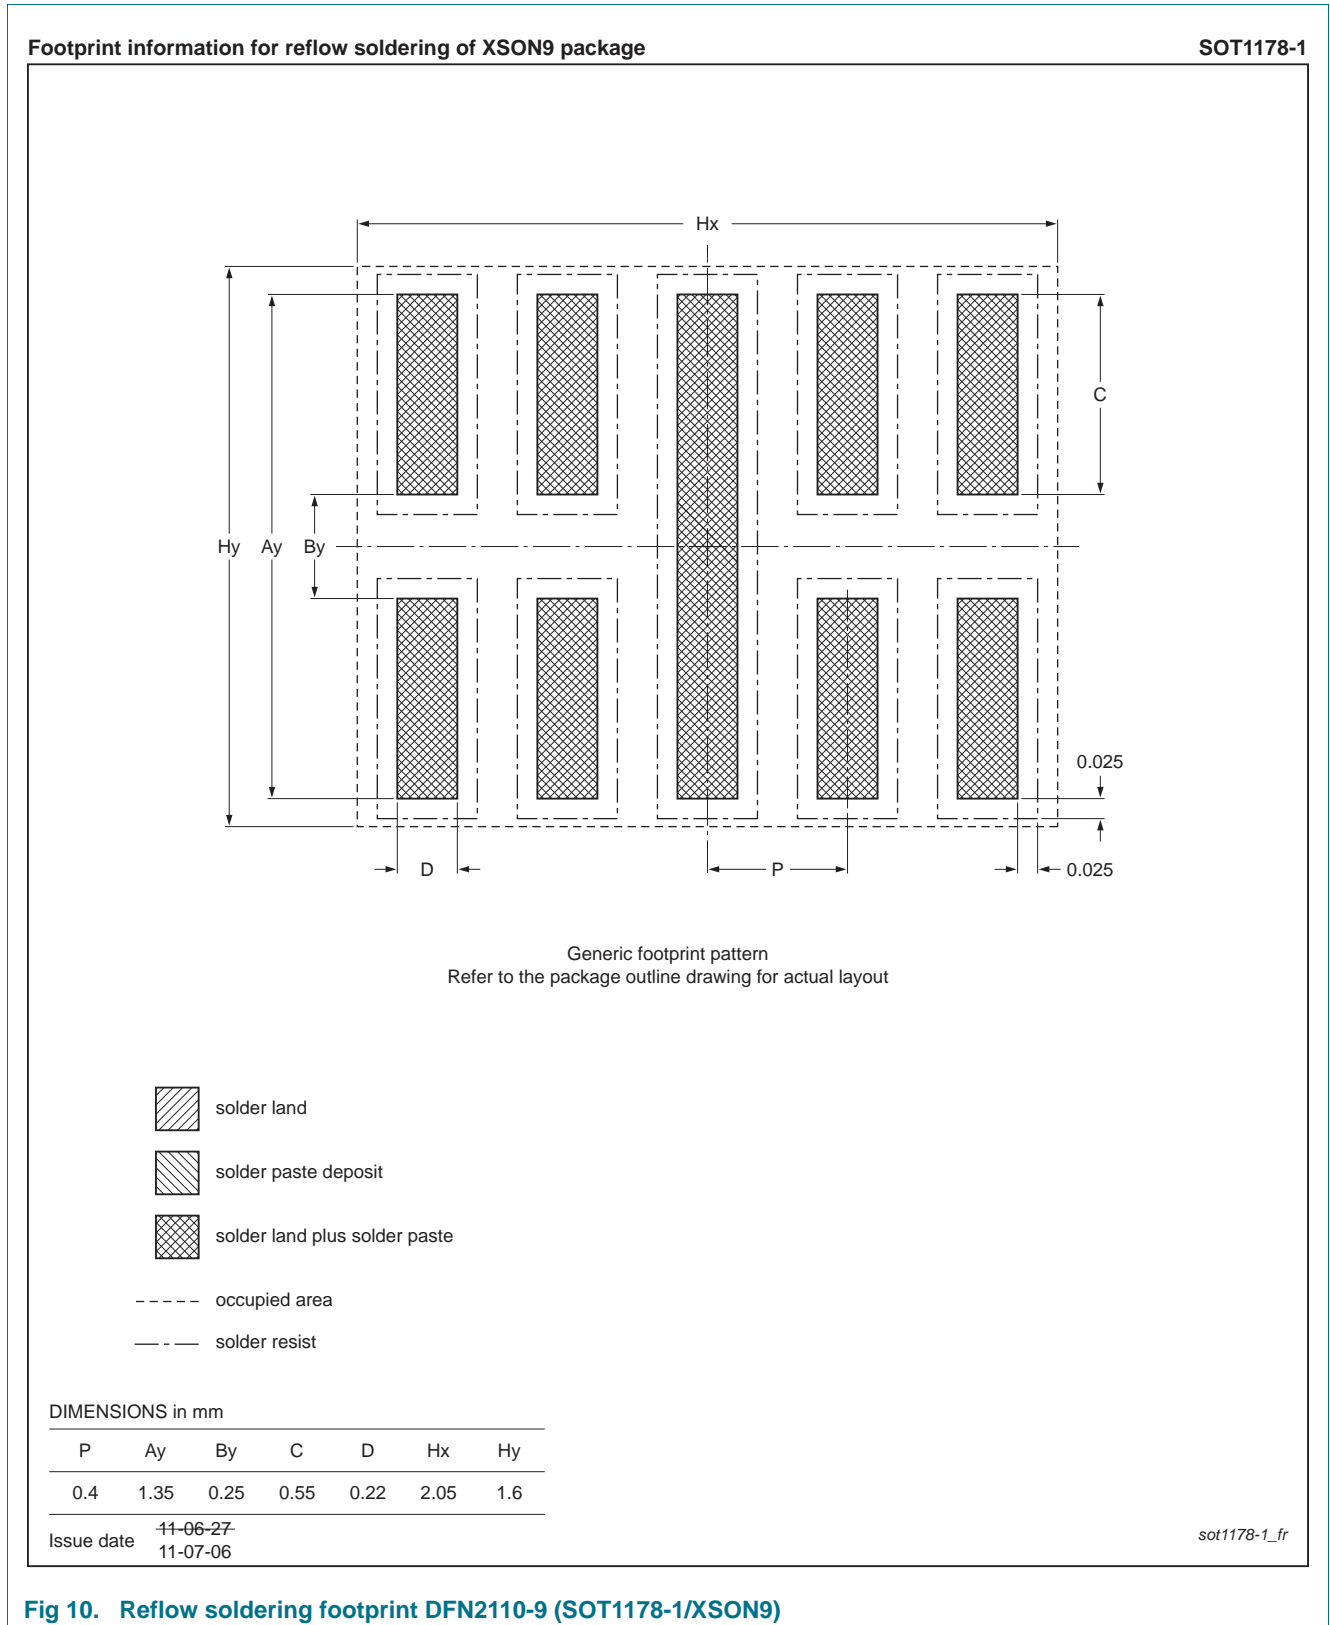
Reflow soldering footprint DFN2110-9 (SOT1178-1/XSON9)
